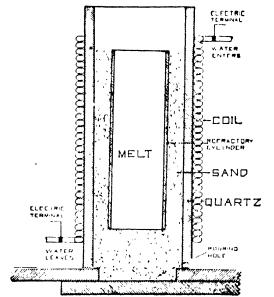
CROSS-SECTIONAL VIEW OF FURNACE FOR MAKING MELTS WITHOUT A CRUCIBLE
